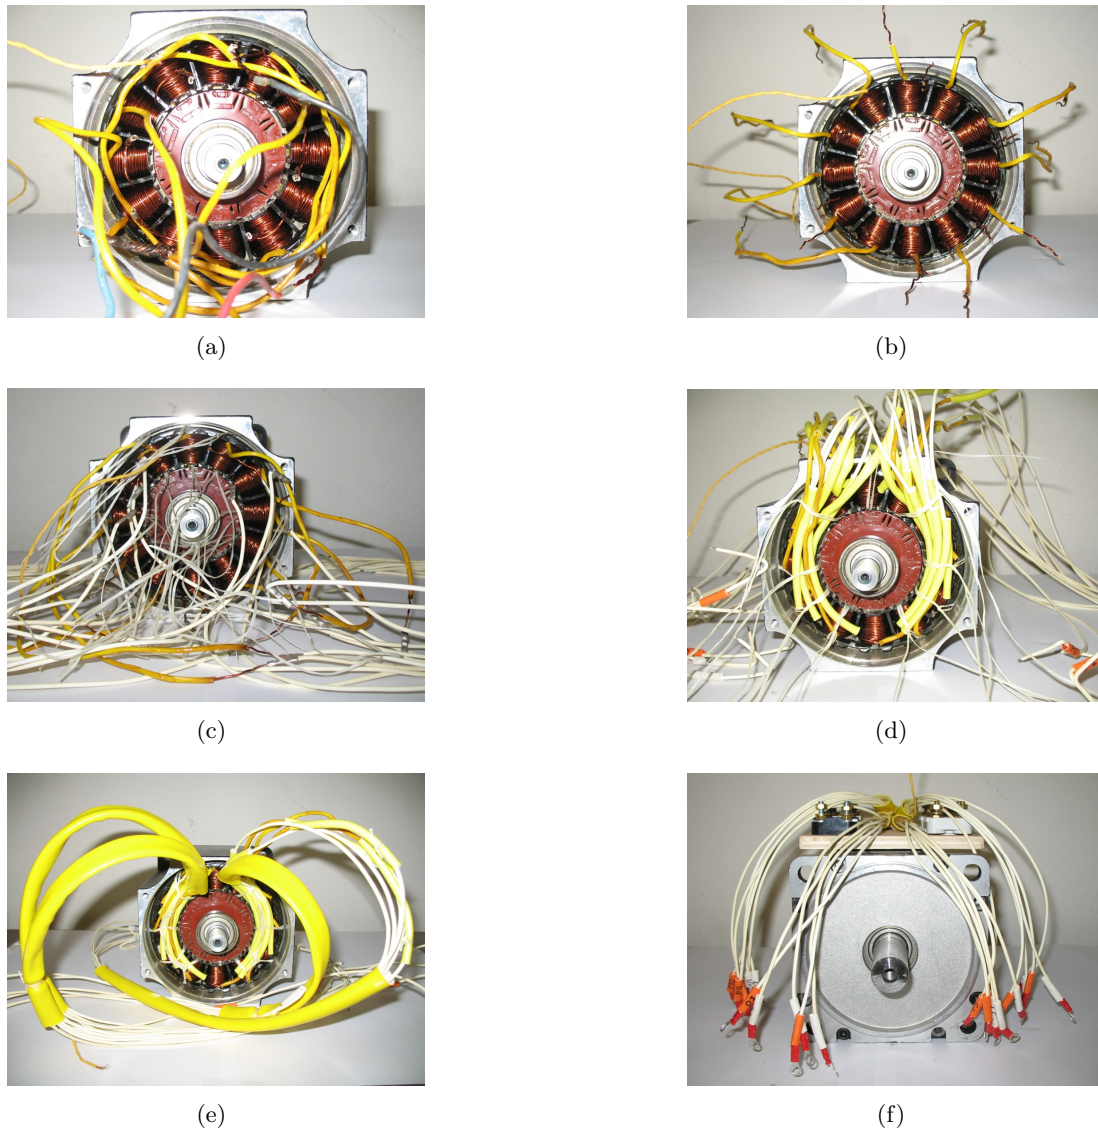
The 12-slot 10-pole IPM machine prototype: from a three-phase motor to a test machine with all the coils terminal available.
